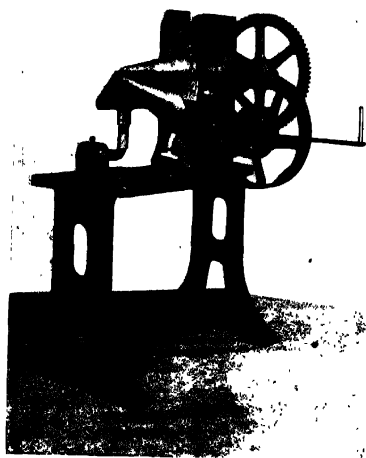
One-rolling machine. (Walter Frost and Co. Ltd.)
